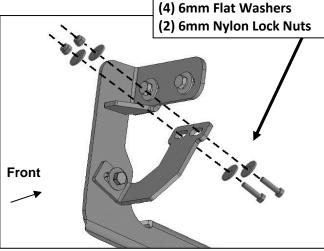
Attach Driver/Left front Support Bracket to front facing side of Mounting Bracket
